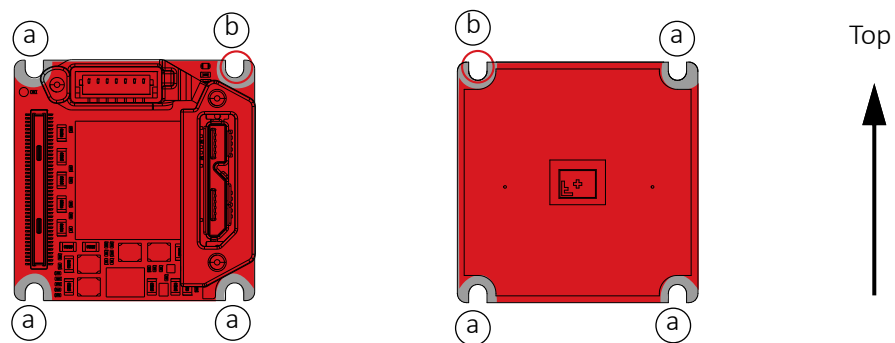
Mounting area of Alvium USB bare board cameras connector side (left); sensor side (right)
